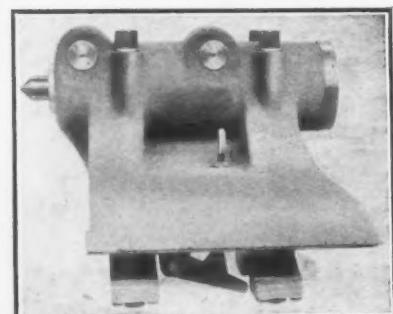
The Tailstock, Showing the Means for Clamping to the Bed and the Thrust Plugs for Locking the Spindle.
